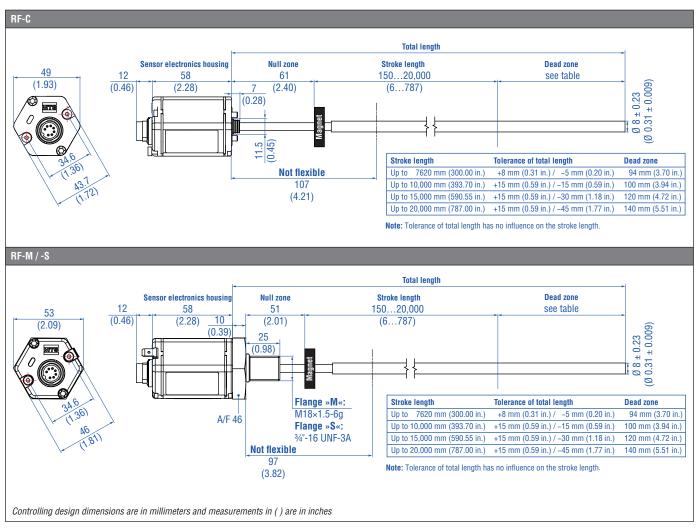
Temposonics® RF base unit with ring magnet (top) RF with threaded flange with ring magnet (bottom)
